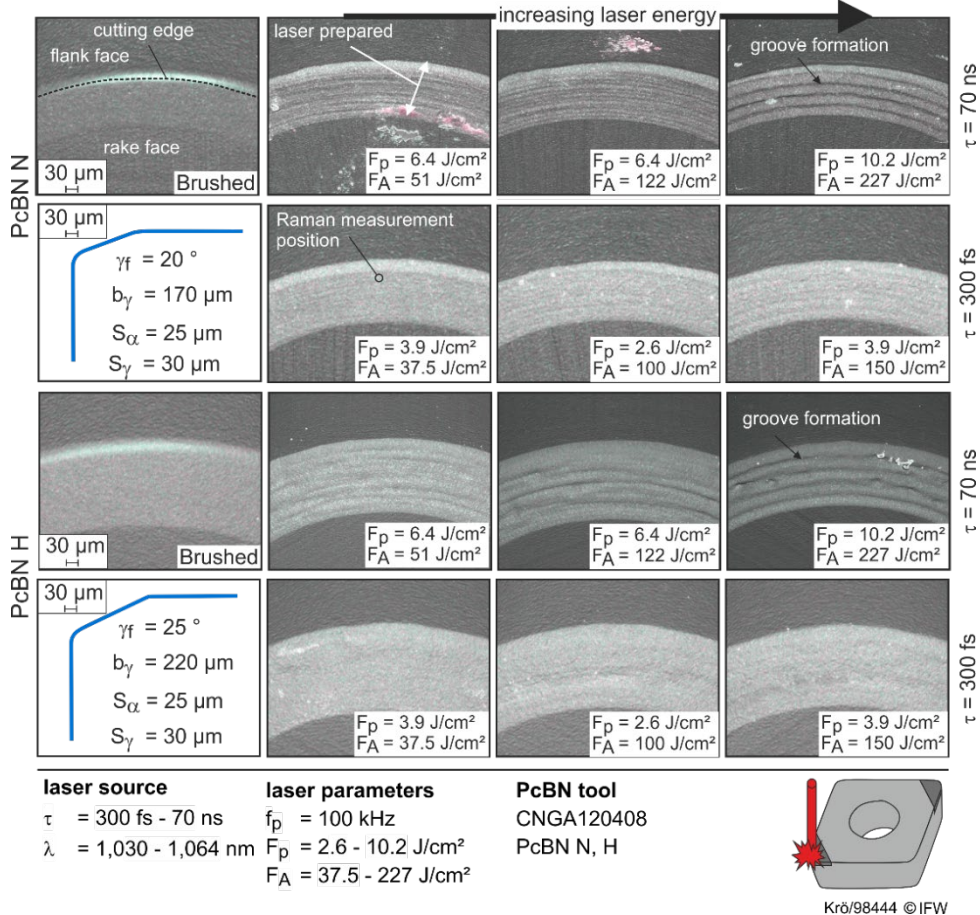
Laser prepared cutting edges of PcBN N and PcBN H tools
